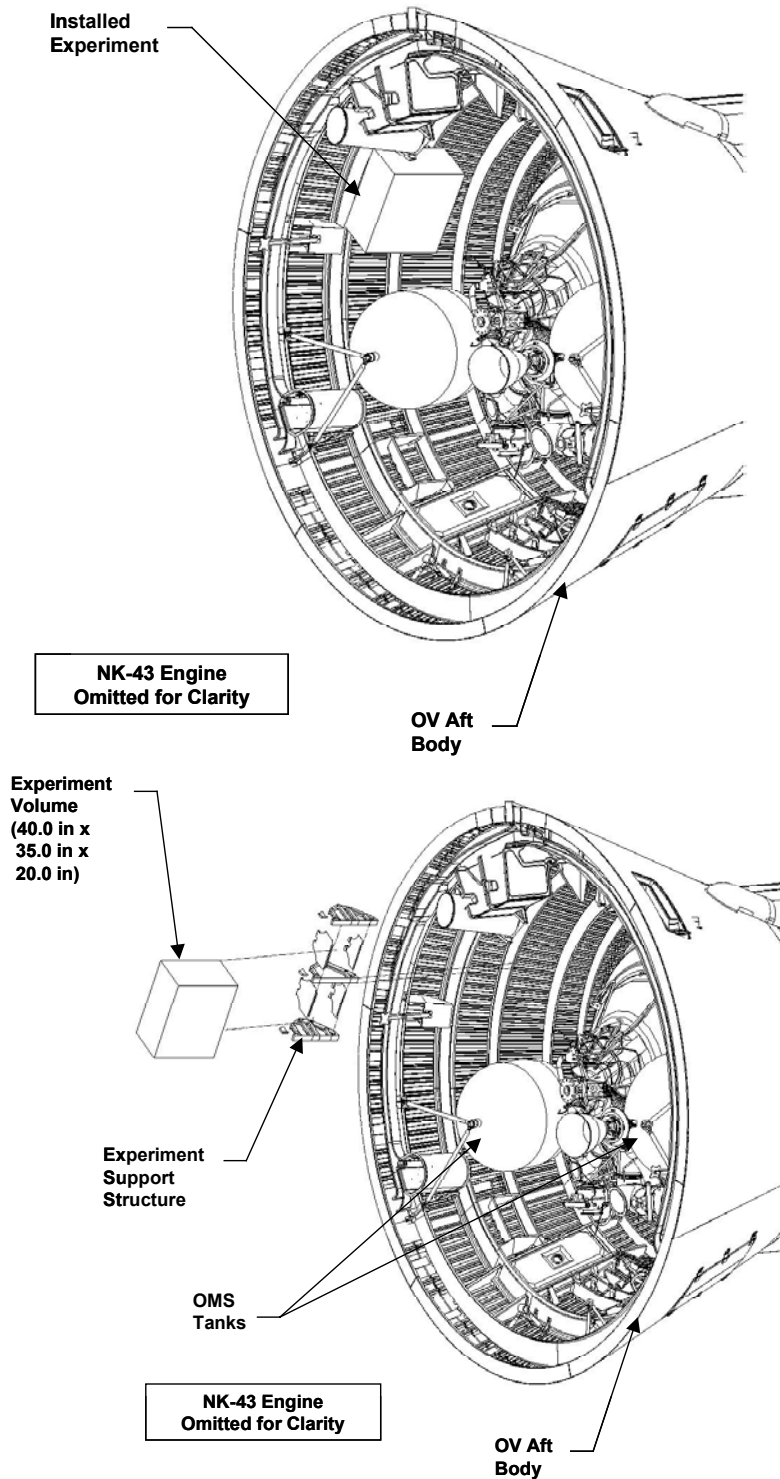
Mounting Structure for Internal Mounting Location in OV Aft Flare
